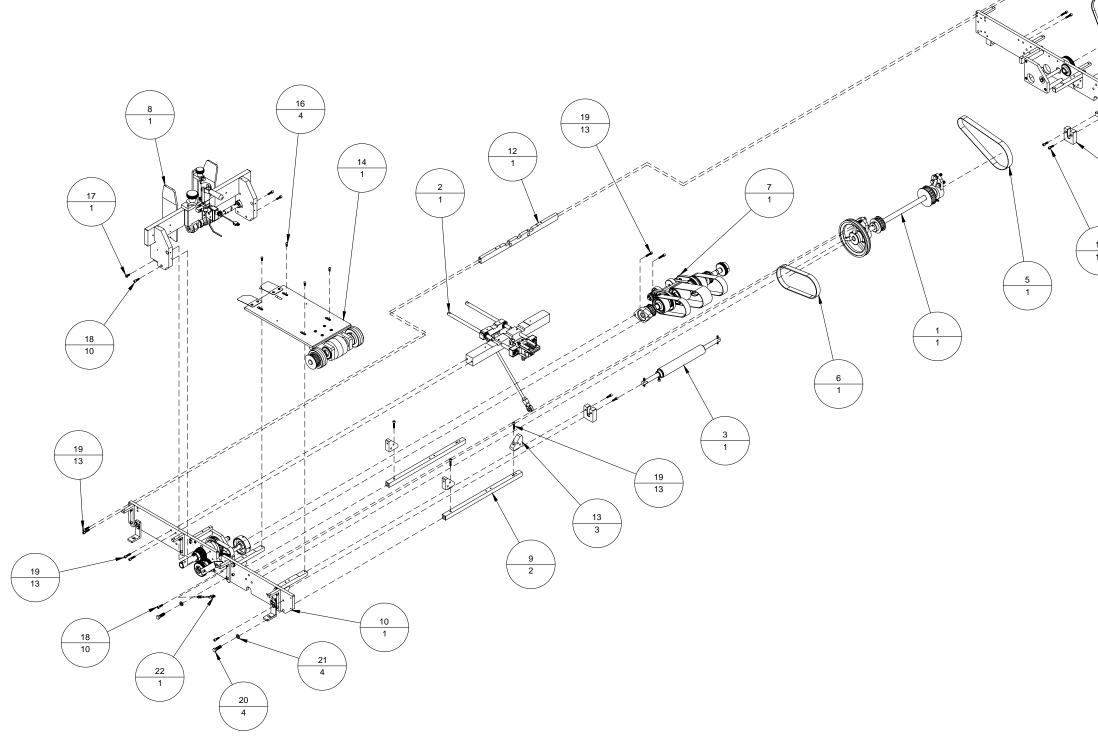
Vacuum Belt Tabletop Assembly (325340AA)
